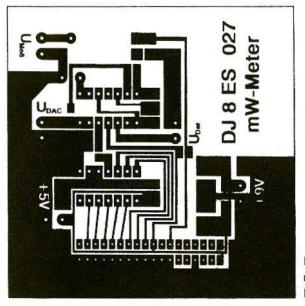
mW Meter Layout DJ8ES 027 The board for the A / D converter is double-sided coated epoxy material 1.57mm thick. The board measures 75mm x 75mm..
